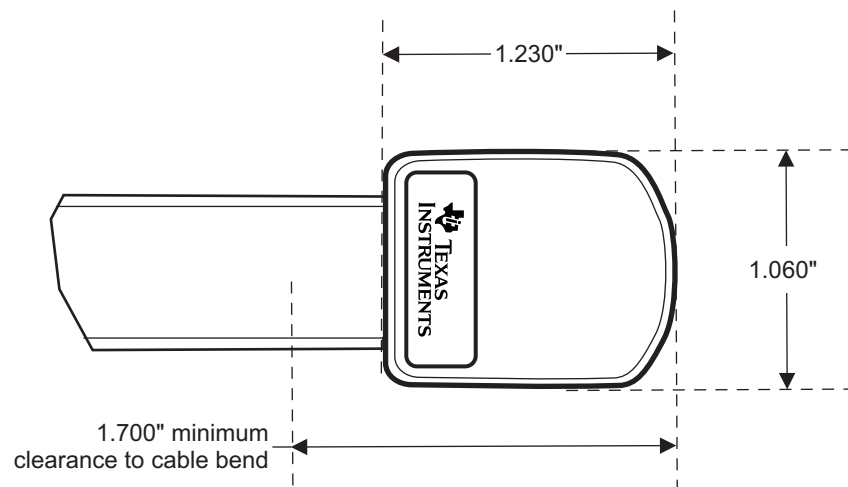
XDS560T TI 60-Pin Target Cable Header Dimensions
